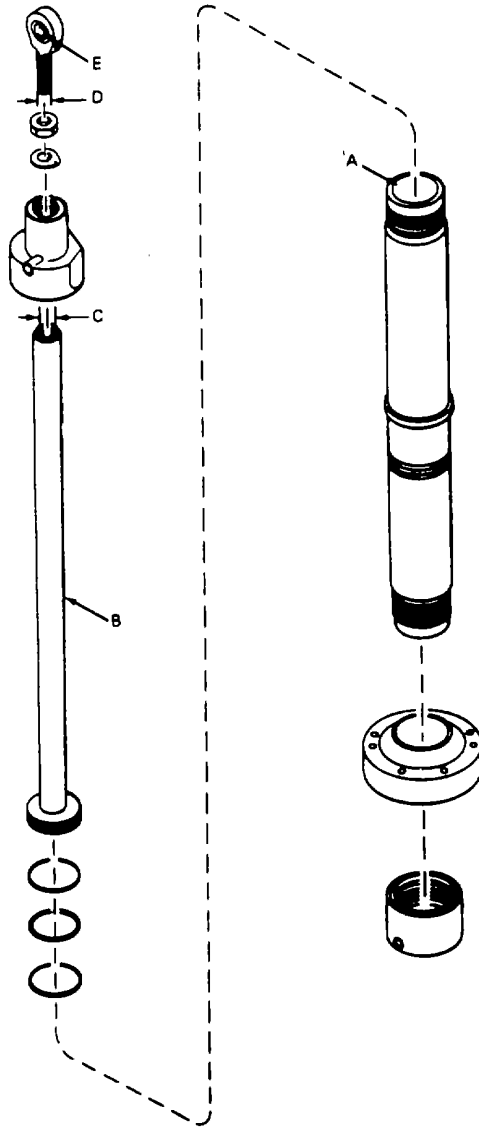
Extension Cylinder - Piston Locknut Removal Using Spanner Wrench.
